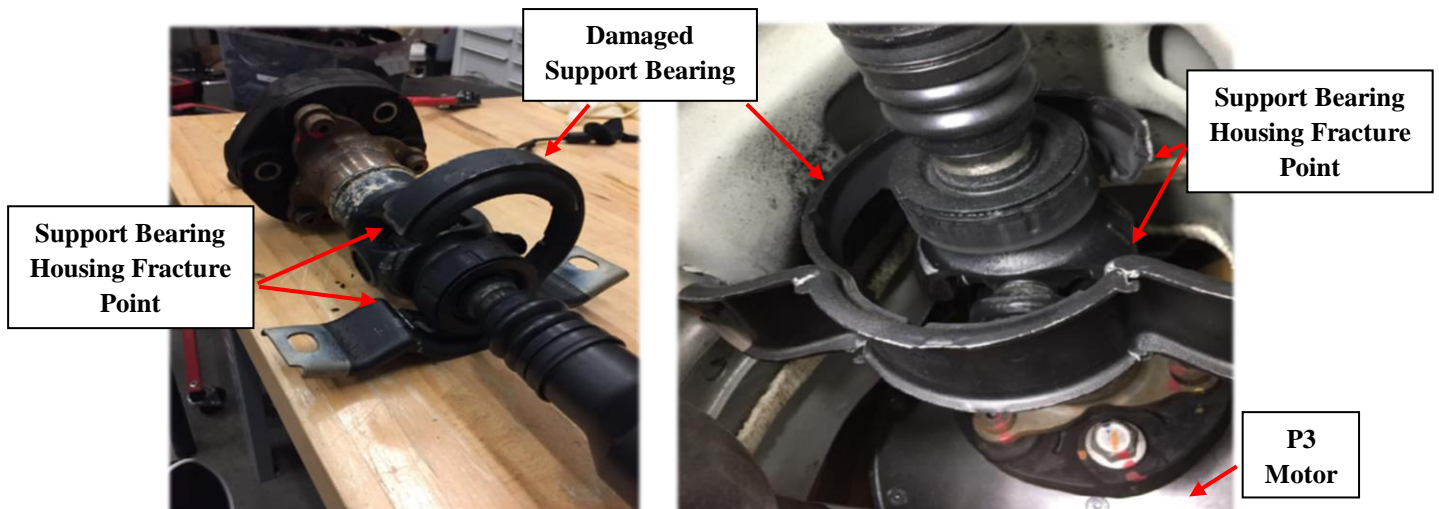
Driveshaft Failure Support Bearing Failure
